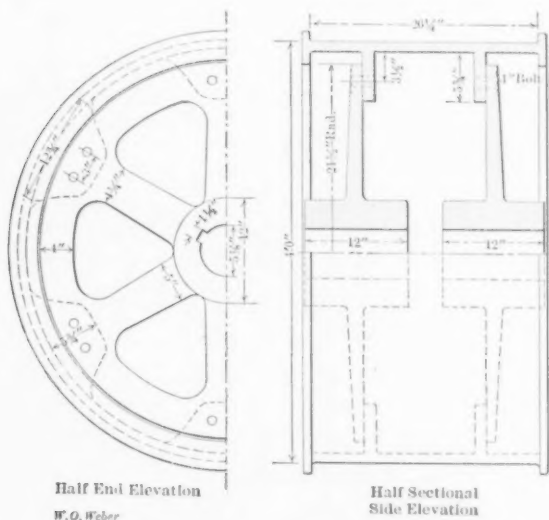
BRAKE WHEEL OF PRONY BRAKE FOR TESTING 68 H.-P. TURBINE.
